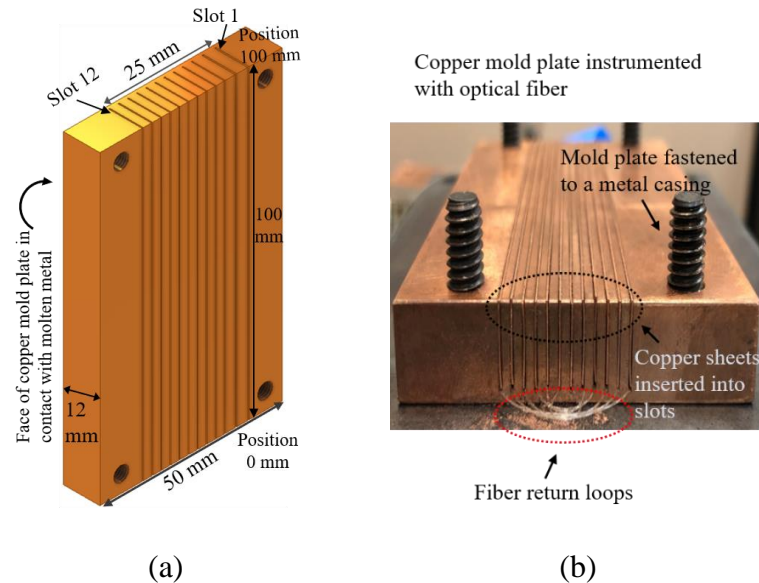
A schematic of the EDM-machined copper mold plate and a photograph of the same after instrumentation with an optical fiber. (a) A schematic of the copper mold plate (100 mm \times 50 mm \times 12 mm) used in the dip test. Twelve slots, each 350 μ m wide, were machined from the back face of the mold plate to within 1 mm of the front face. (b) A photograph of the instrumented mold plate. The slots on the copper mold plate were instrumented with a single continuous optical fiber configured with multiple return loops at both ends of the mold plate. The slots were backfilled with copper powder and copper sheets. The mold plate was fastened to a metal casing.
